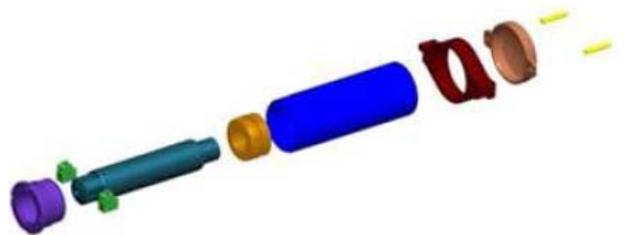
An inline for assembly view of the Hydraulic Cylinder Pro Engineer Model.
